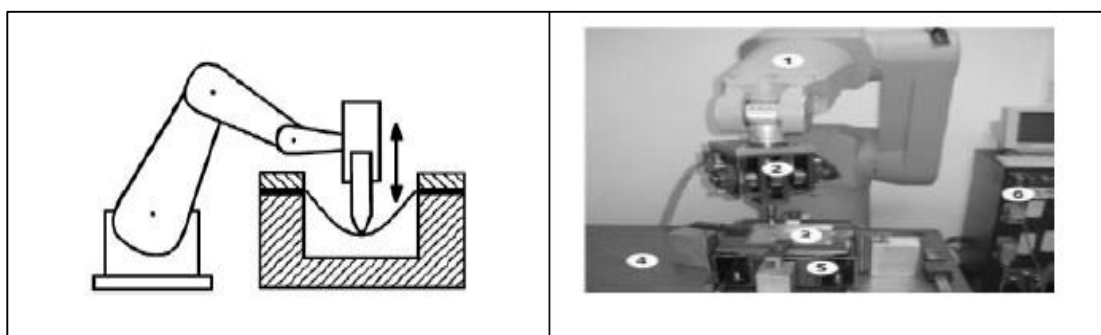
Hammering sheet forming process. (Left) incremental hammering (right) robotic arm used for hammering process [1].
